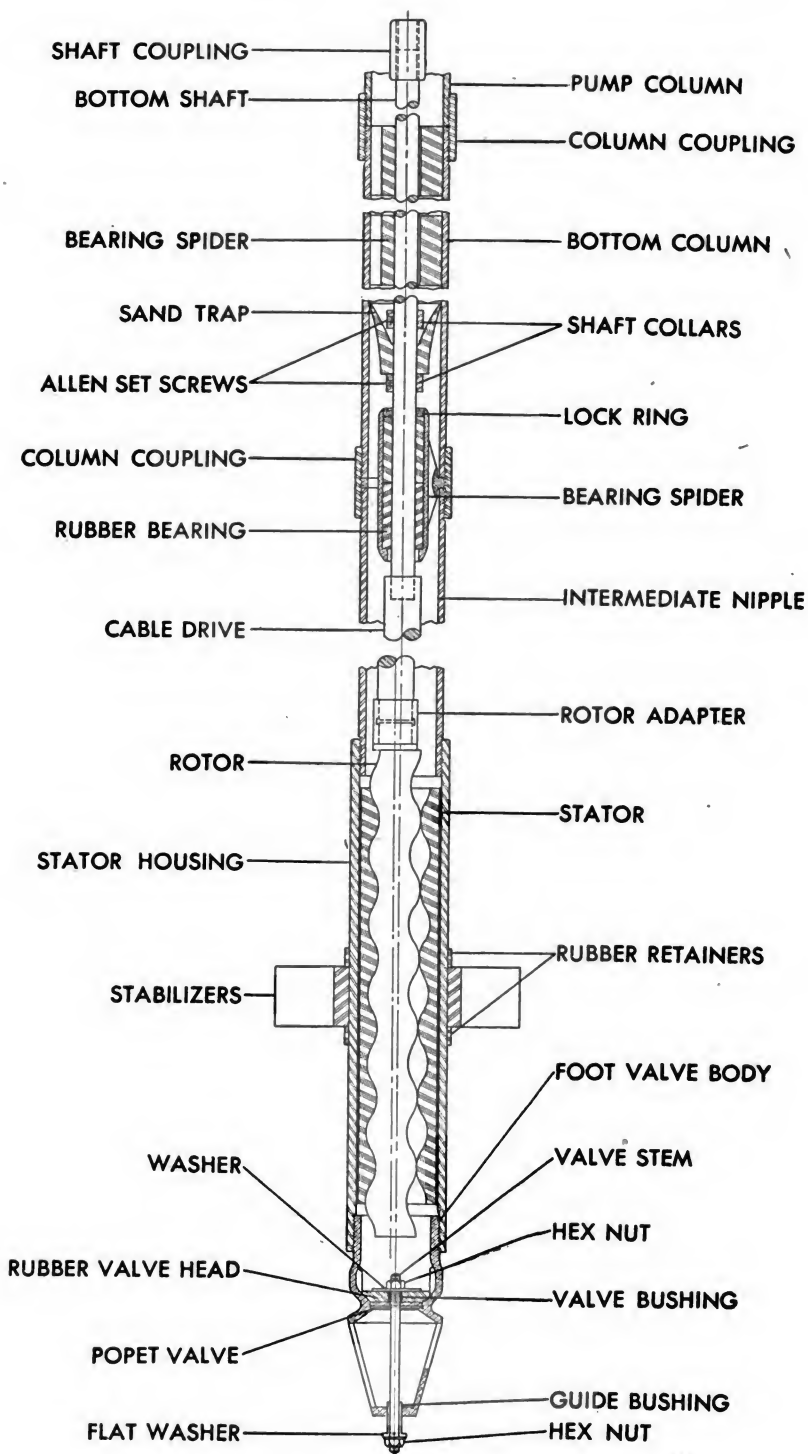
Peerless Hi-Lift pump-bowl assembly.
